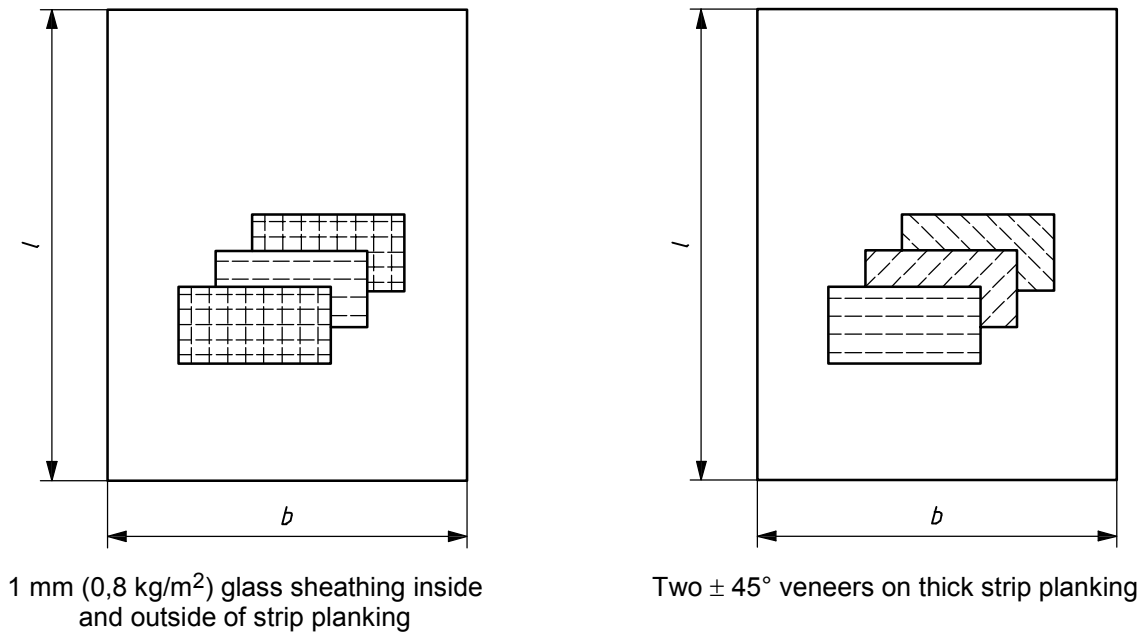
Strip planking with heavy fibre sheathing or veneers
